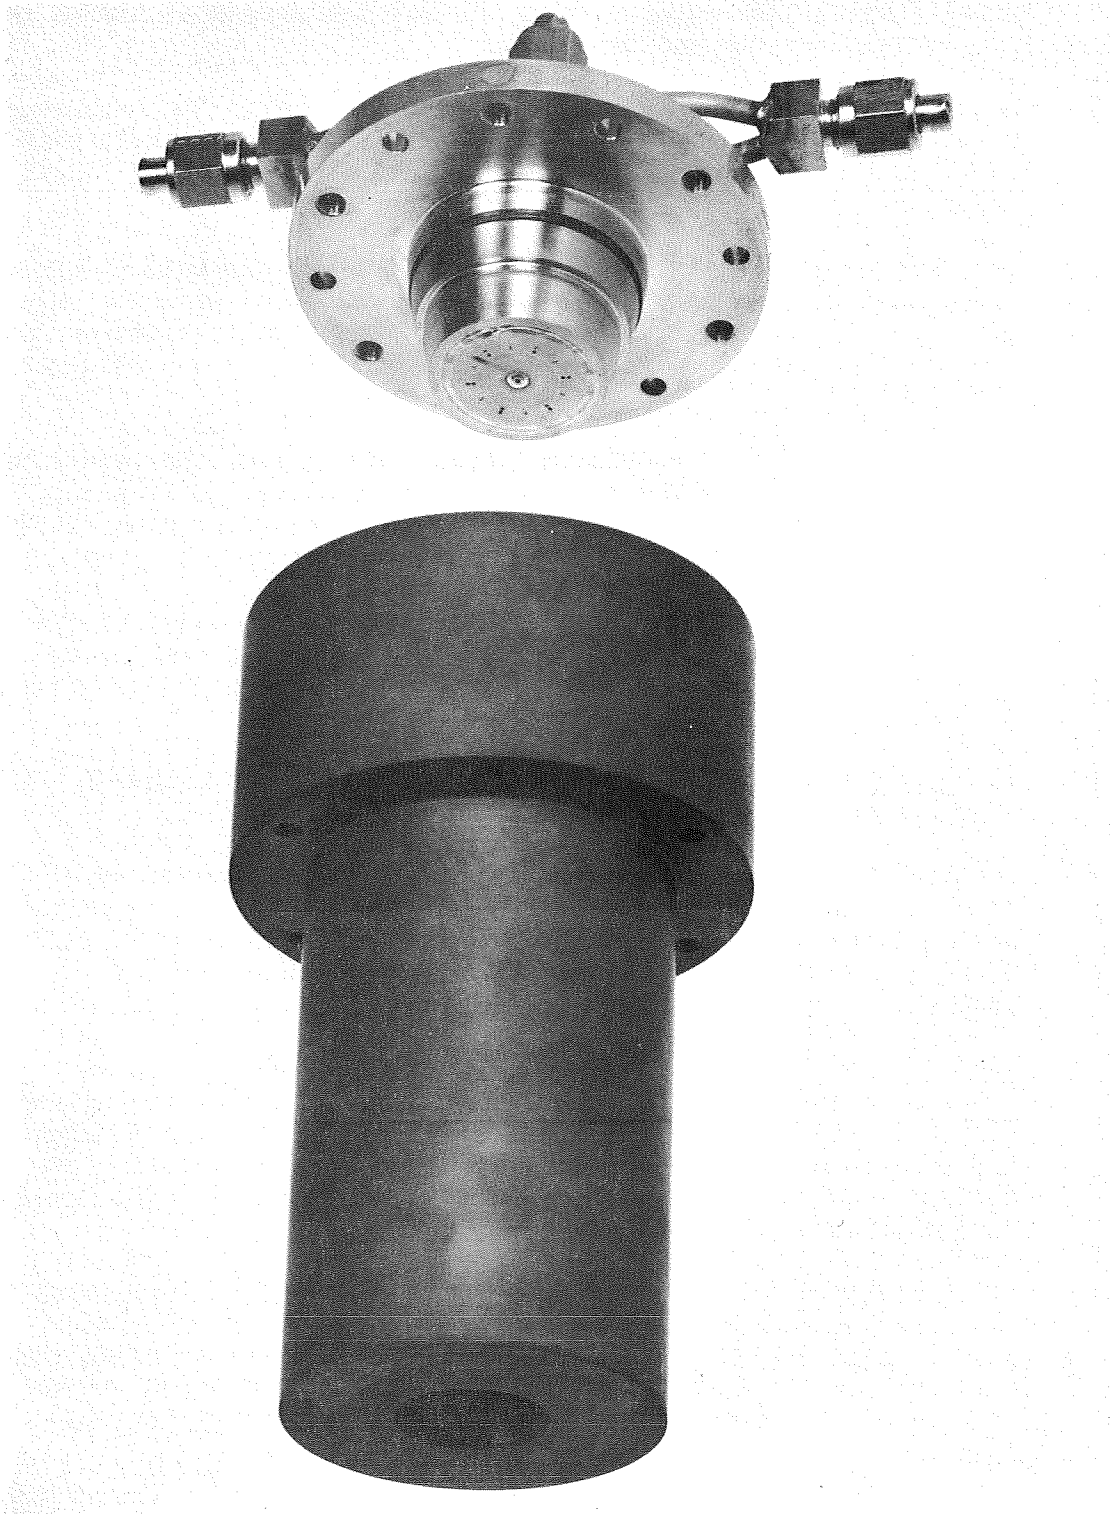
POCO-AFX-5Q Machined Graphite Heat Sink Thrust Chamber
